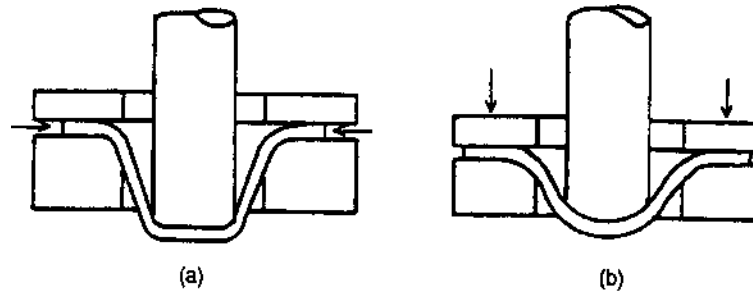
Schematic drawing to show (a) deep drawing; (b) stretch forming. (From Ref. 5.)
